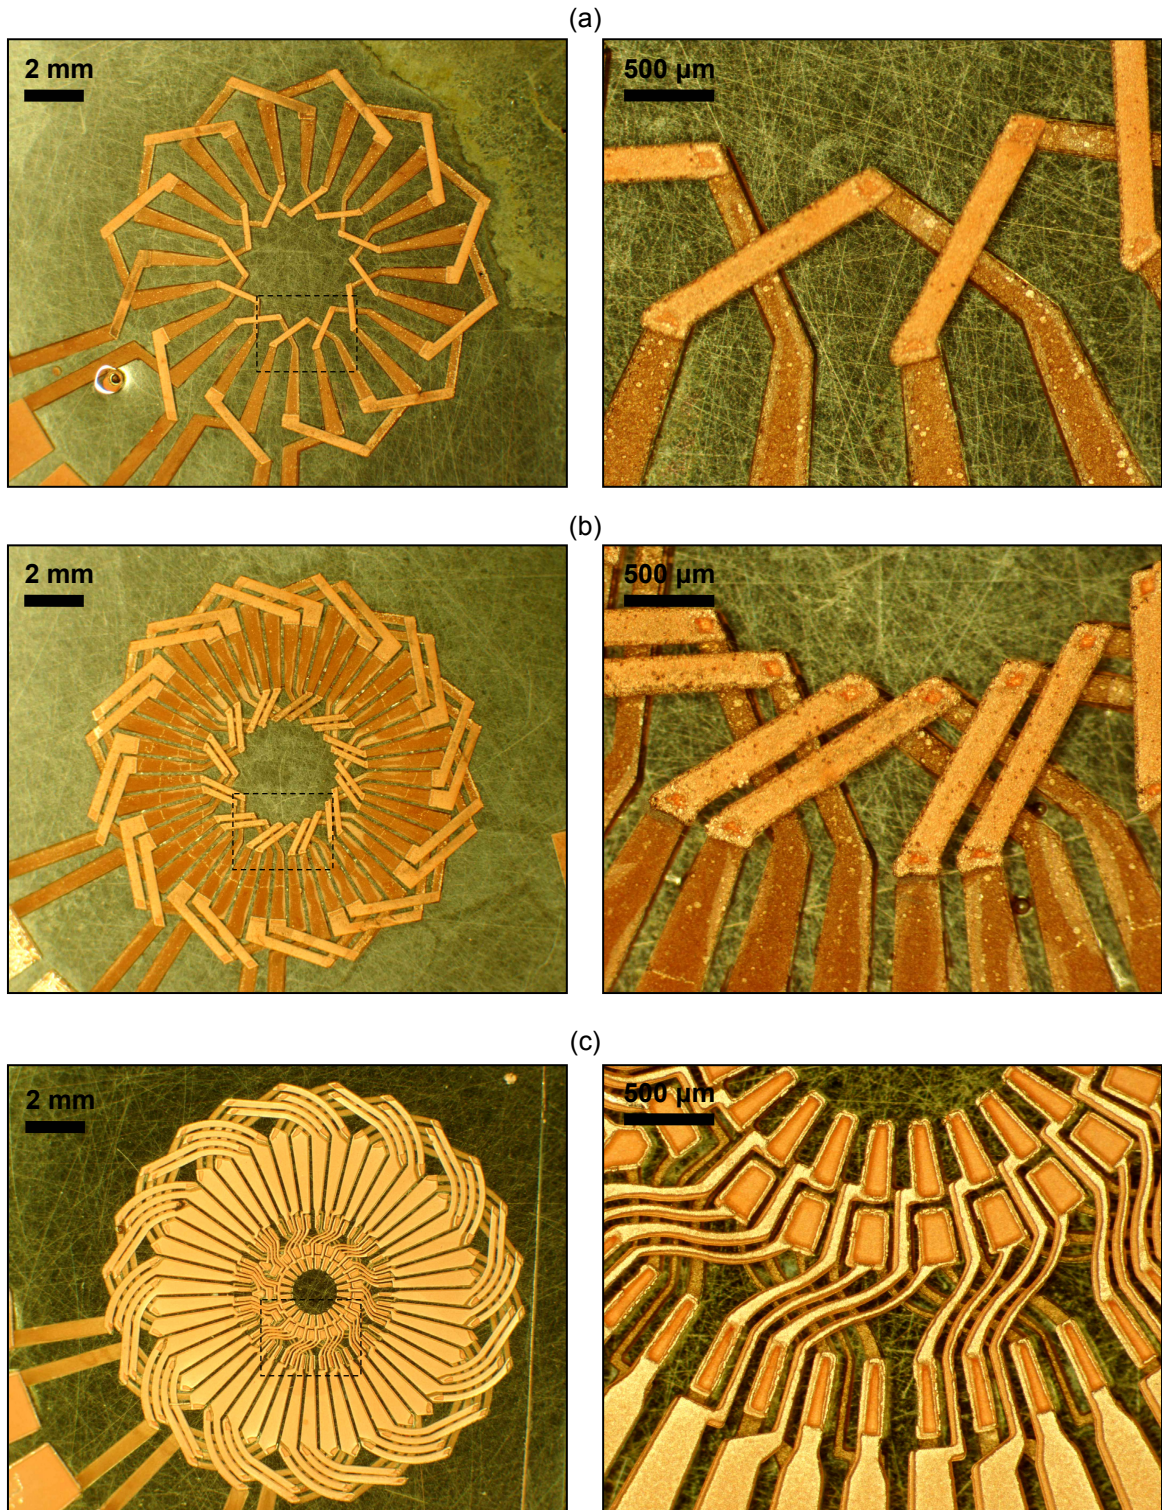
Images of fabricated (a) 1-turn, (b) 2-turn, and (c) 4-turn per pole PM machine stator windings showing wide view and detail of inner end turns.
